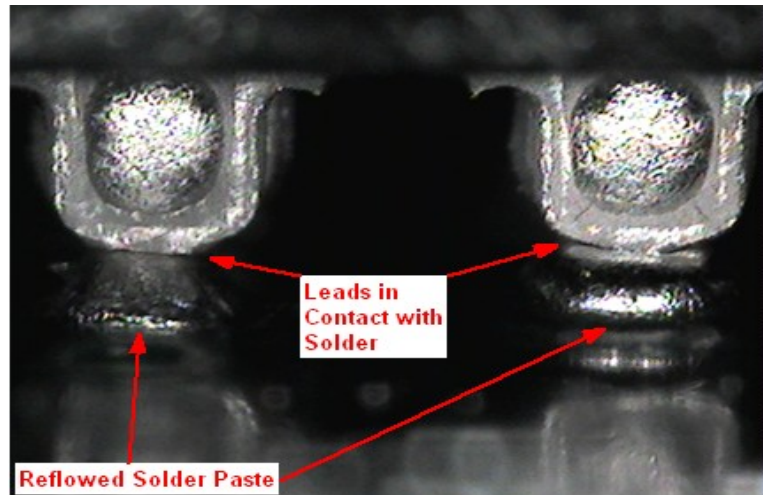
Defective outer row solder joints. 外排不良焊锡点
